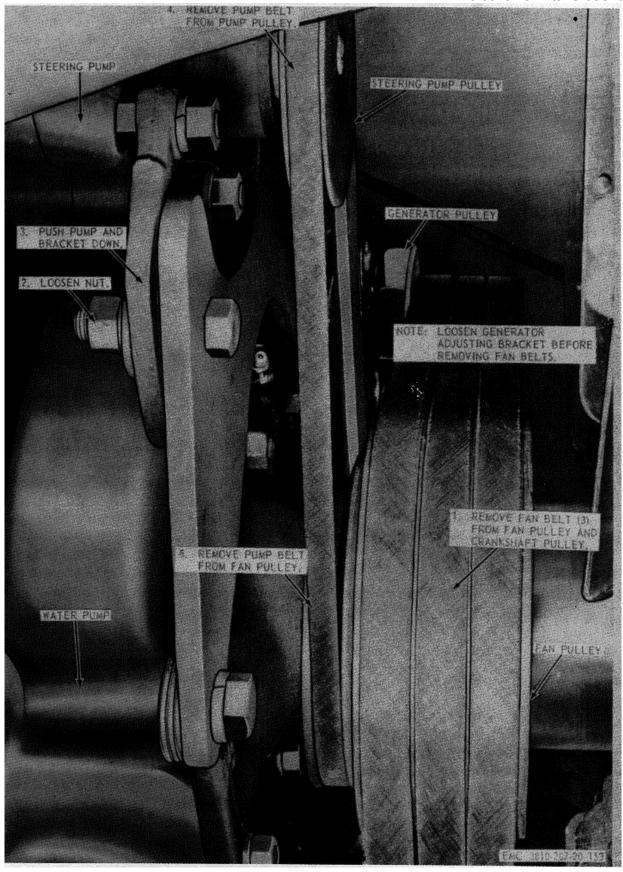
Fan belts and hydraulic steering pump belt, removal and installation. 199
